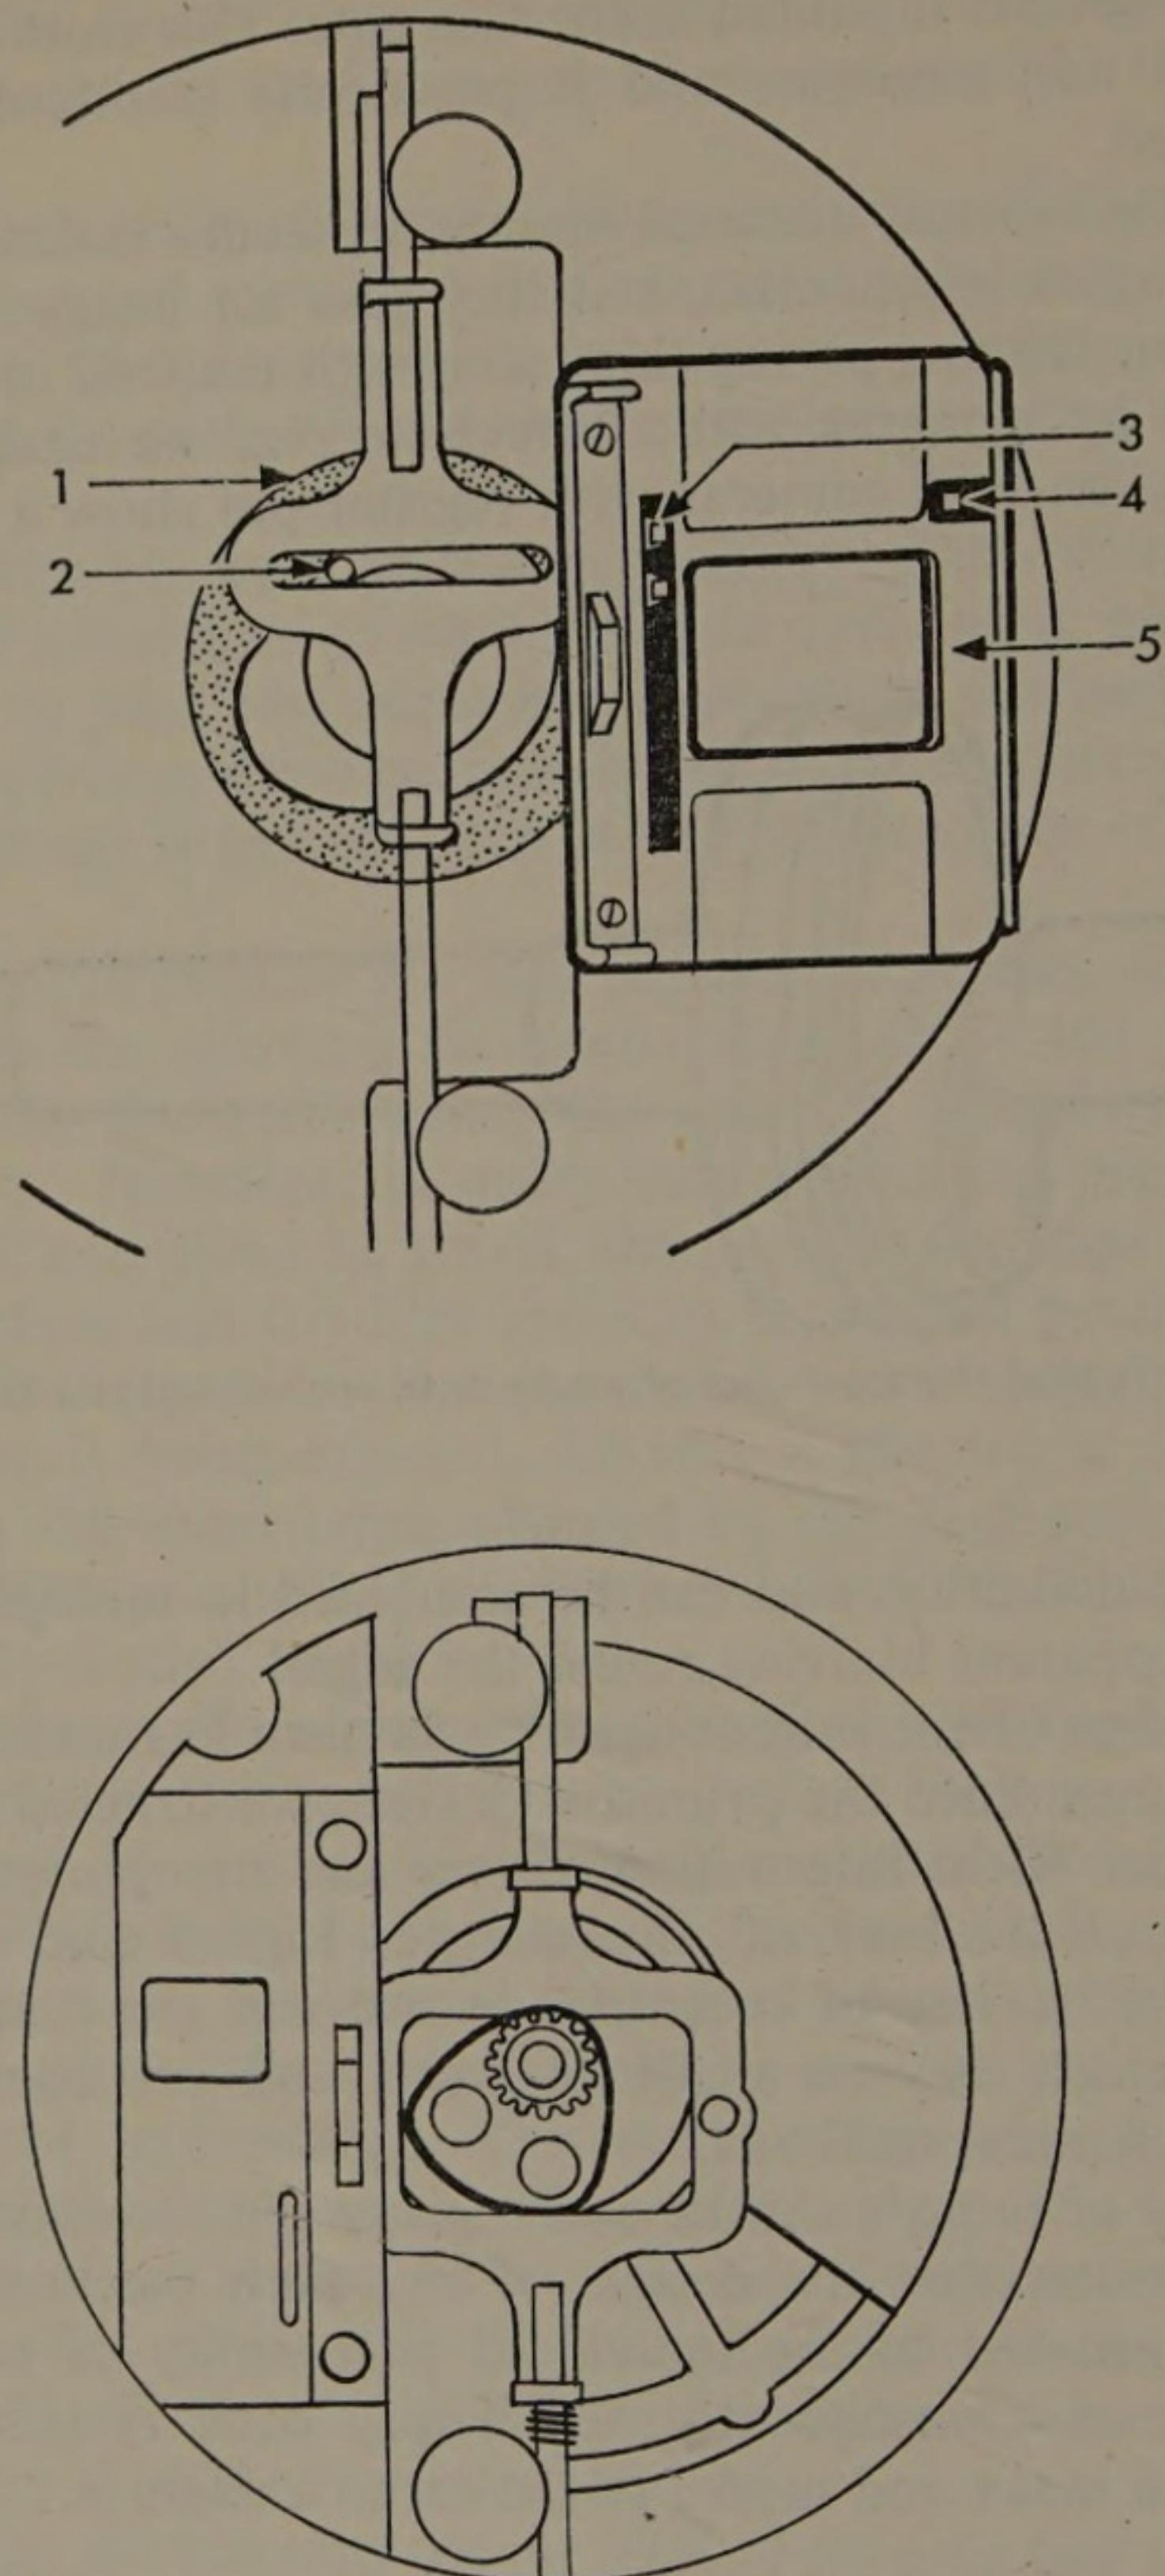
Top. Action of eccentric pin on a shuttle frame, in a Traid manufactured camera, similar to the Eyemo. (1) Cam, (2) eccentric pin, (3) shuttle claws, (4) register pin, (5) aperture plate. Bottom. Use of a three-sided eccentric working on a similar principle upon the intermittent mechanism of the Filmo camera.
